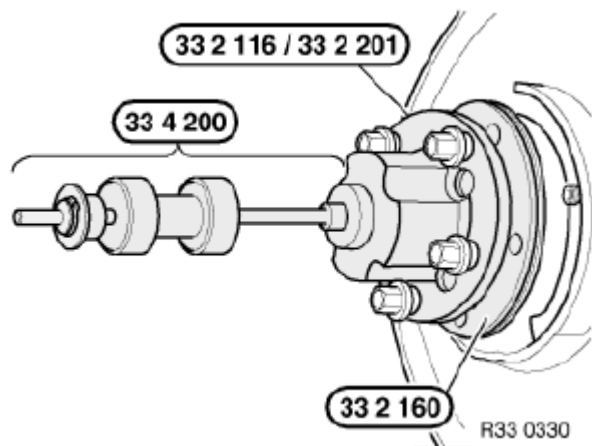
Identifying Special Tools (33 2 116 / 33 2 201, 33 2 160, 33 4 200)
